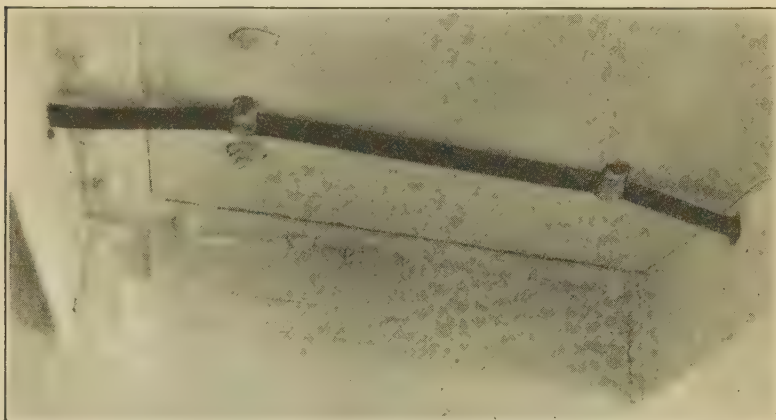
Deck beams welded to bulkhead on S.S. *Algonquin*.
